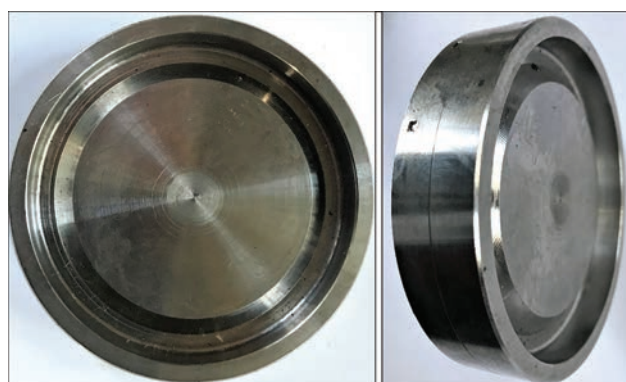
Design of bottom of hydraulic cylinder (height is 35 mm)
